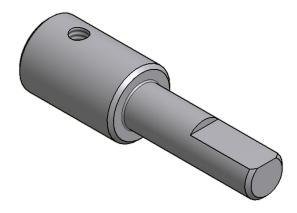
SENSOR MOUNT SHAFT 3D MODEL.
